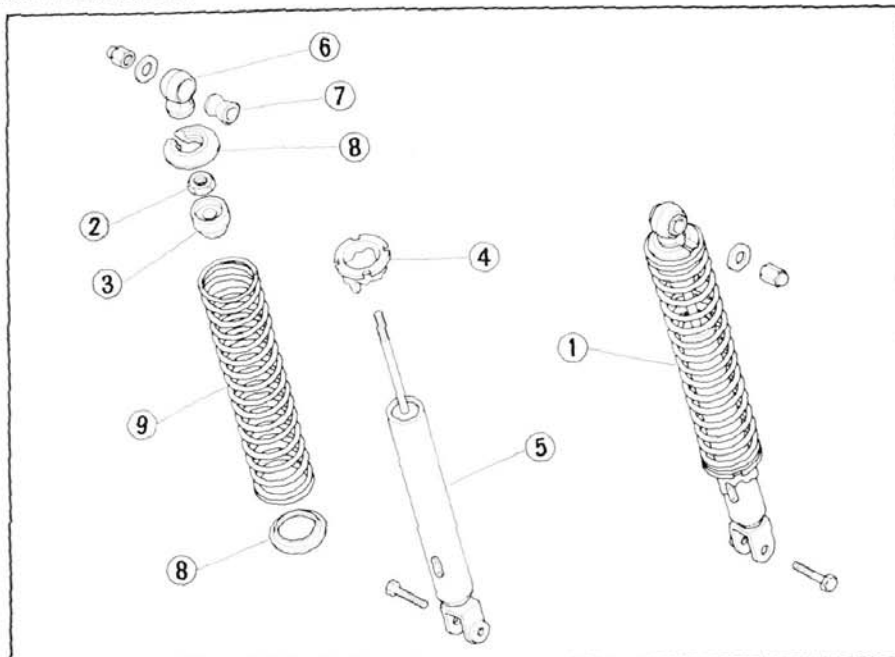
① Rear shock absorber assembly ④ Spring adjuster ⑦ Joint rubber
